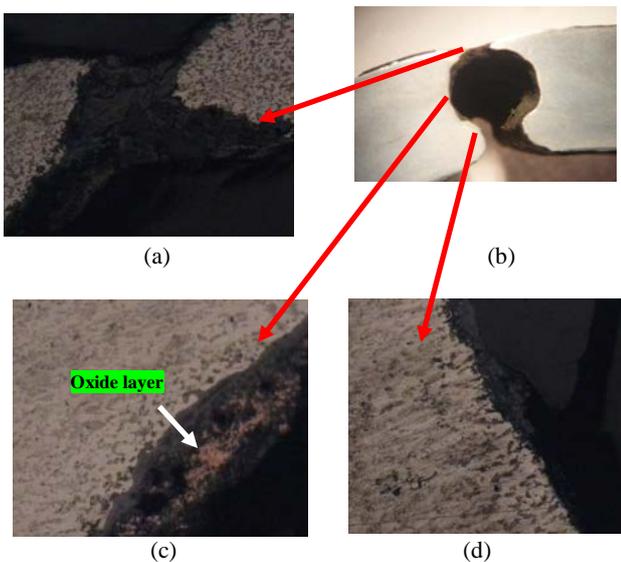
(a) Top part microstructure view of pitting with leak tube (b) Pitting with leak tube sample (c) Middle part microstructure view of pitting with leak tube sample (d) Bottom part
